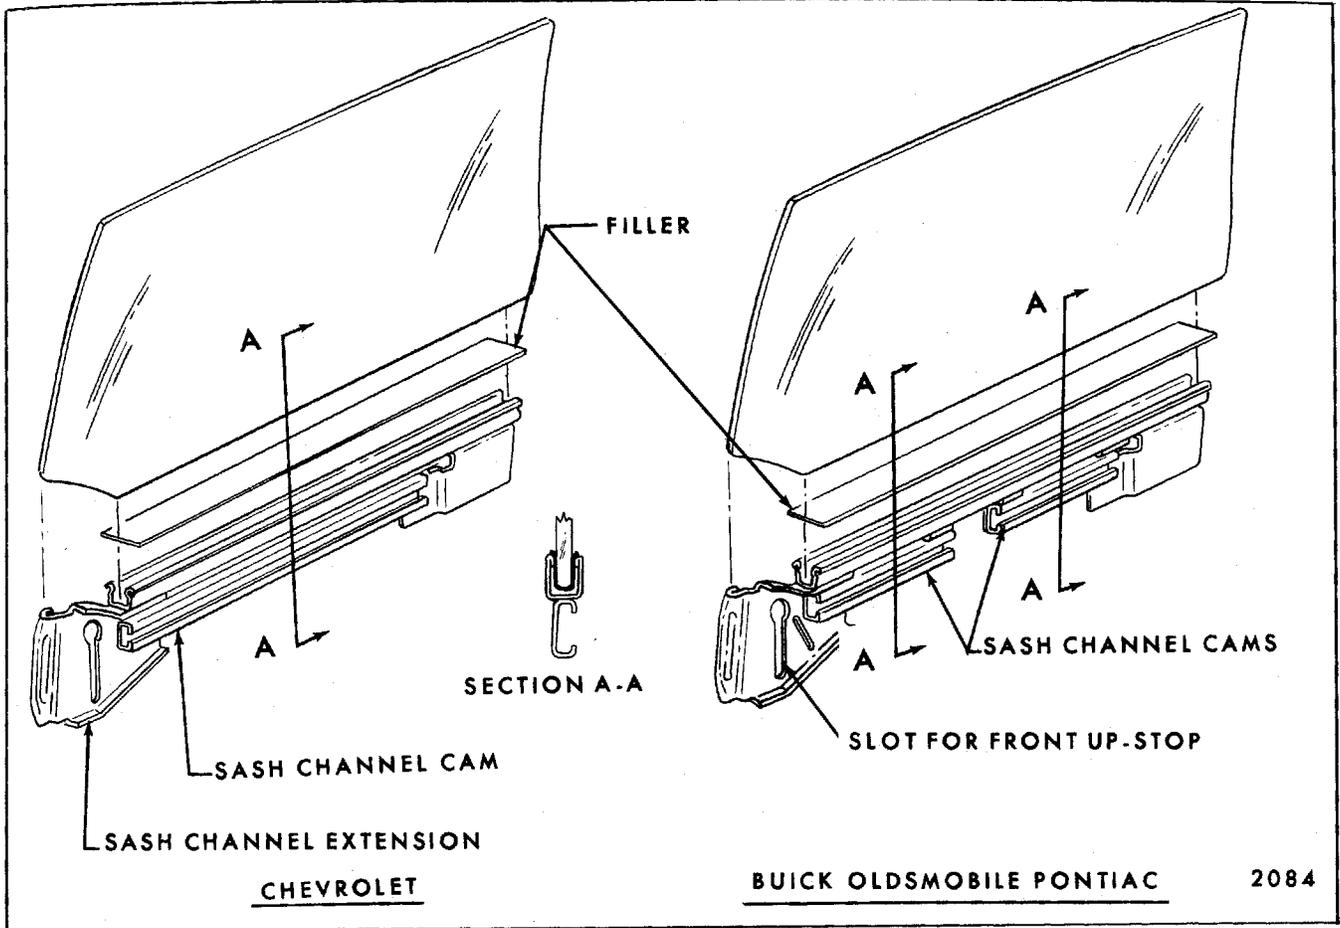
Front Door Window Assembly - "A-17 and 67" Style
